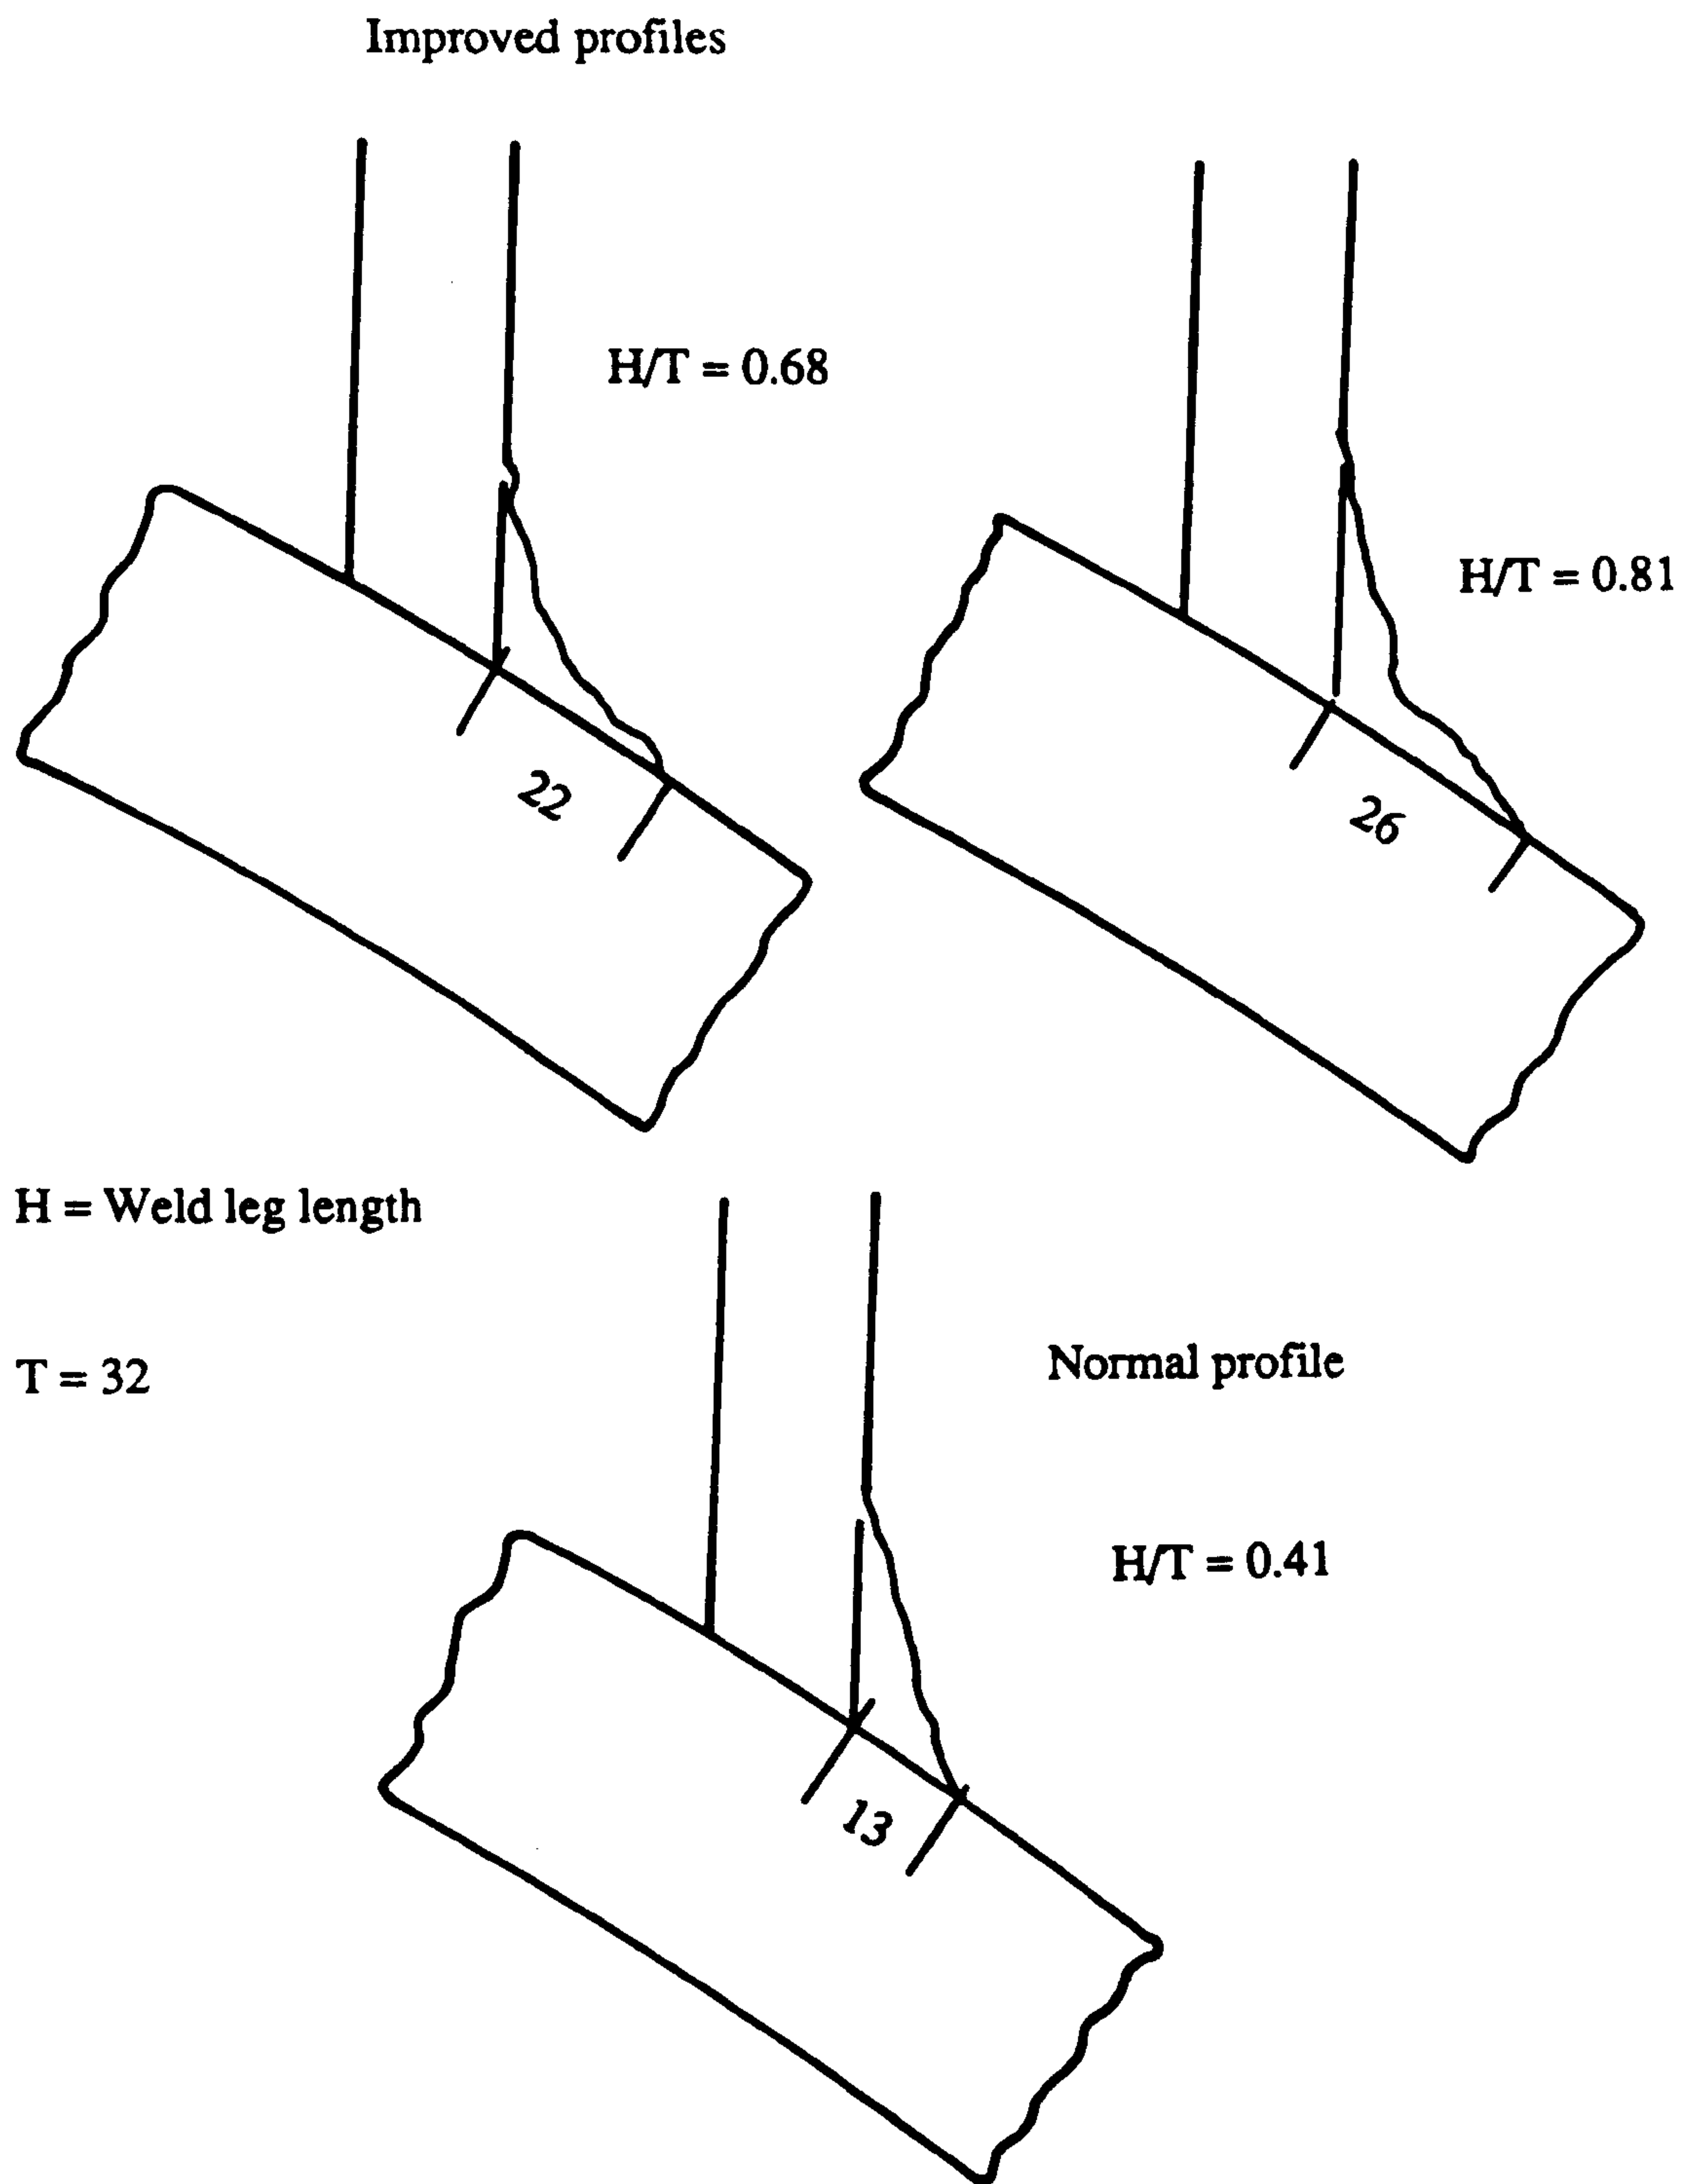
Ordinary and improved weld profiles used in the Dutch tests by deBack and Vaessen (1.9)
